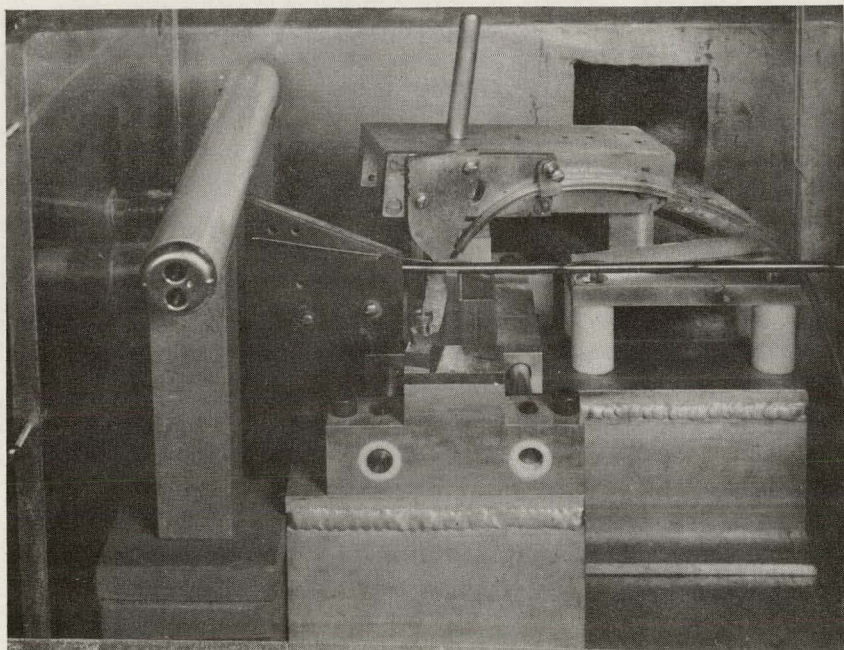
Weld fixture for high frequency welding equipment.
